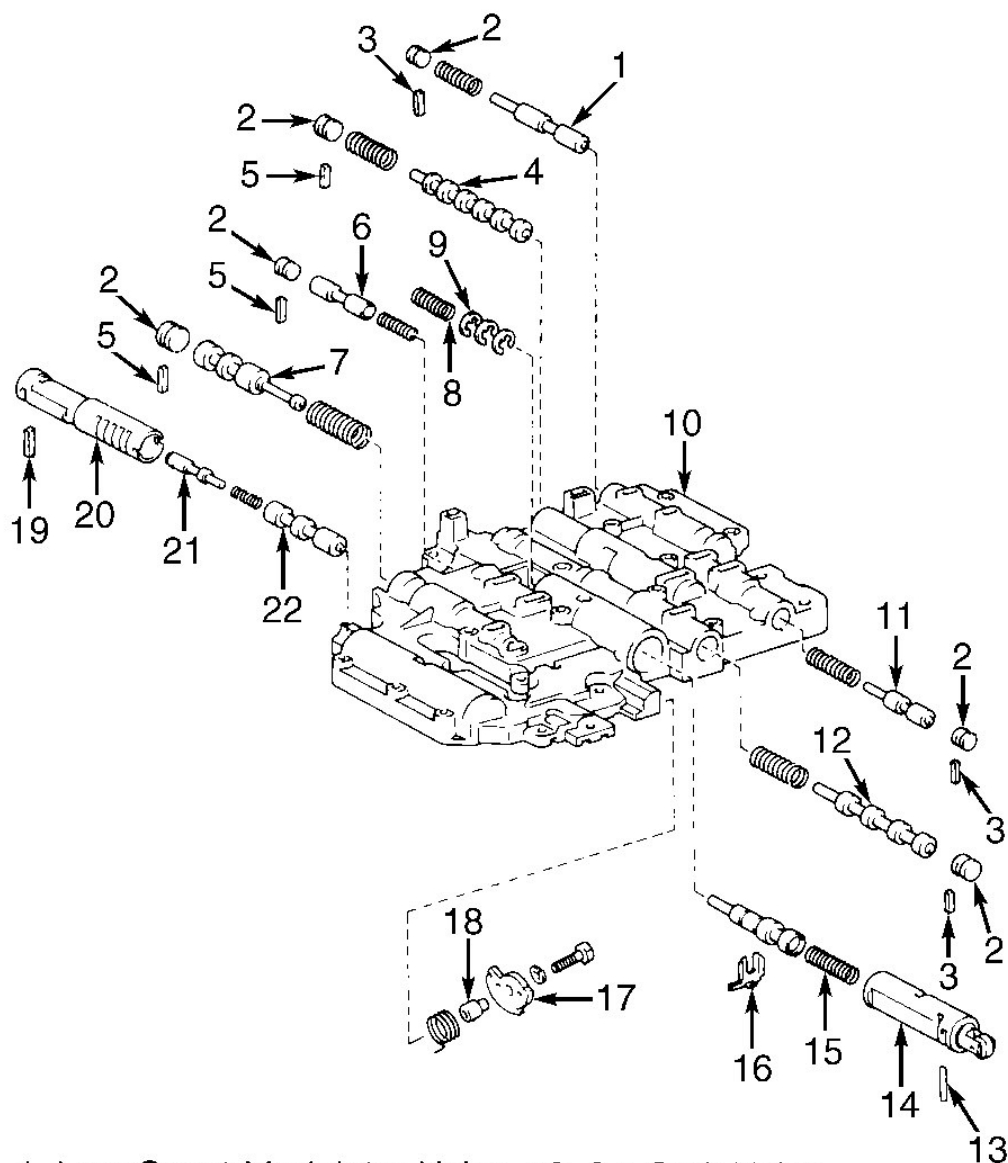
Identifying Upper Valve Body Keys, Seats, Pin & Stopper Locations
